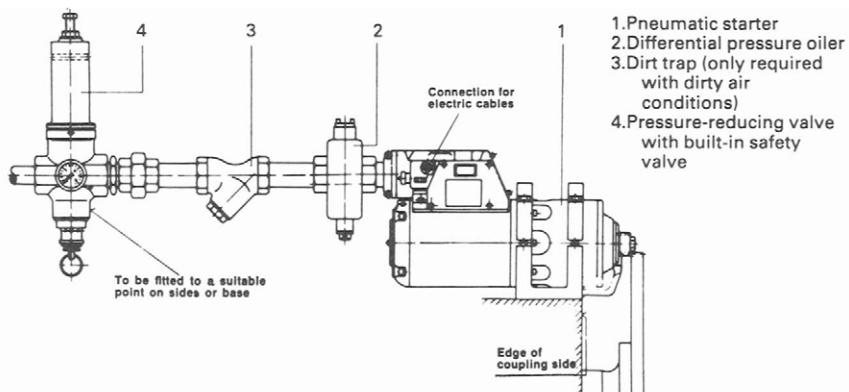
Remote-controlled air starter, saddle-mounted and ancillary parts in the main air supply line.
